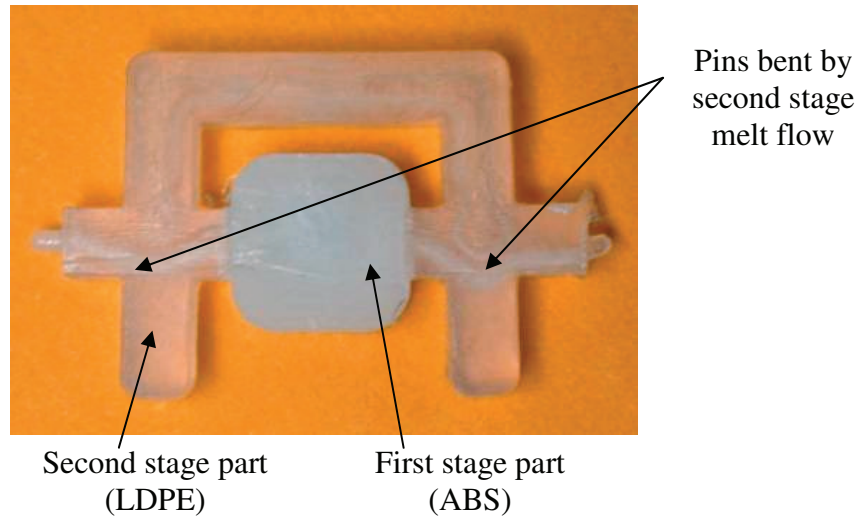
Example defective component due to plastic deformation of premolded component
